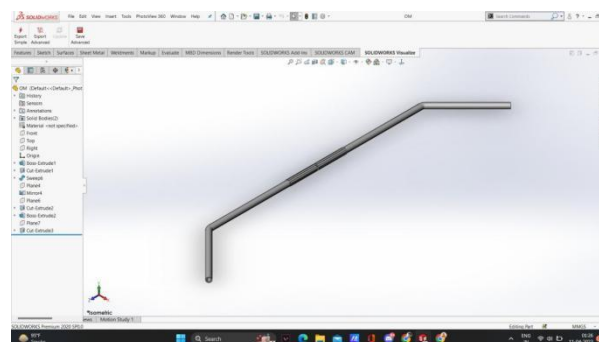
Cad model of Anti-roll bar showing disengage position
